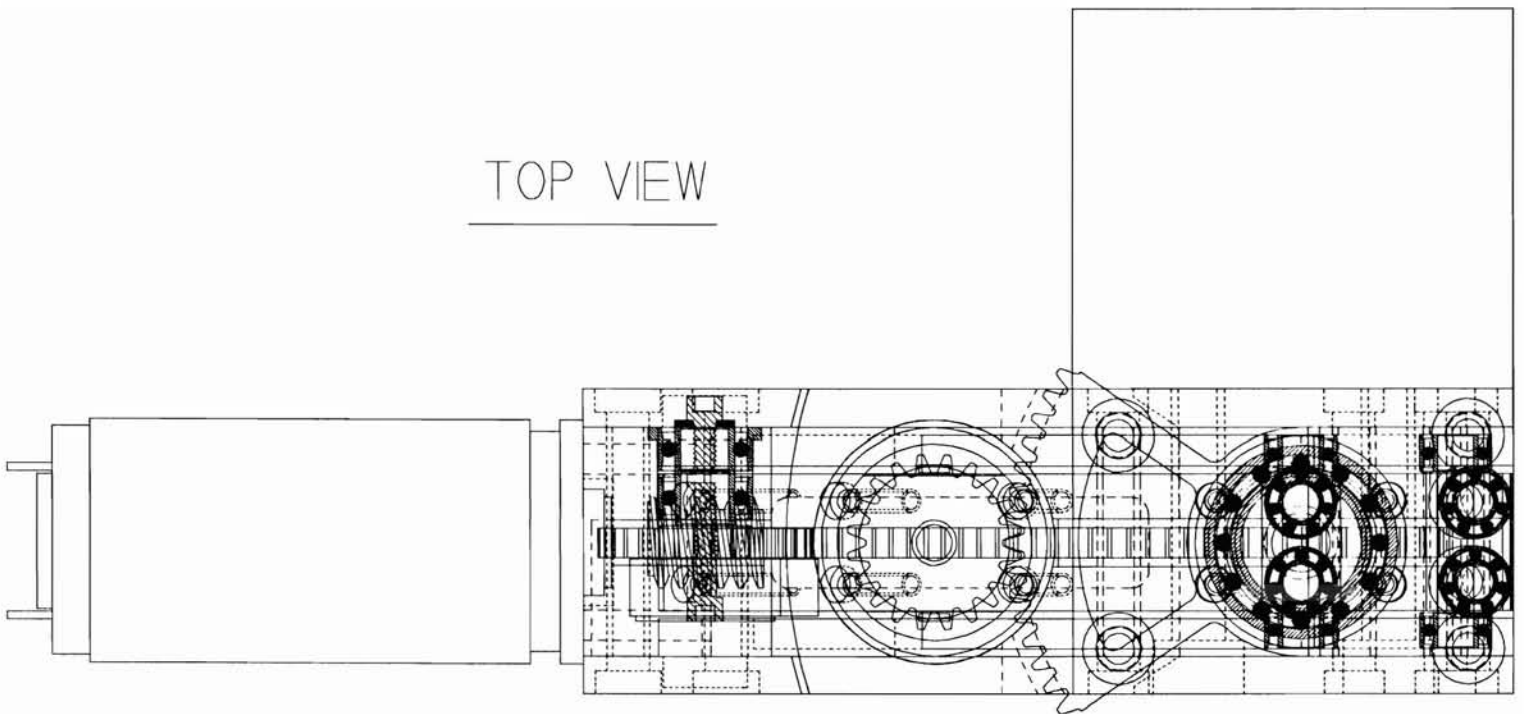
Top view enlargement (2X) of thumb joint design for Phase-II glove controller mechanism. (Dwg. GLOVE005.GCD)
